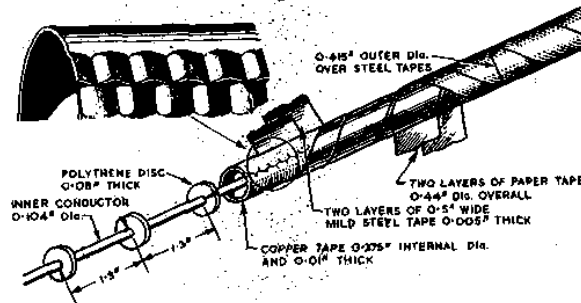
BRITISH DIMENSIONED COAXIAL TUBE.
